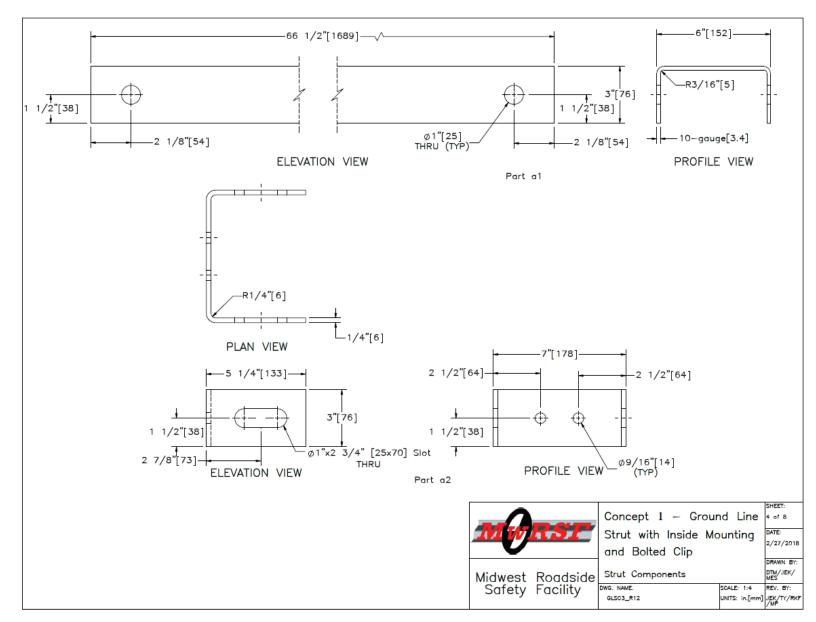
Ground Line Strut Design Concept No. 1 – Strut Components
